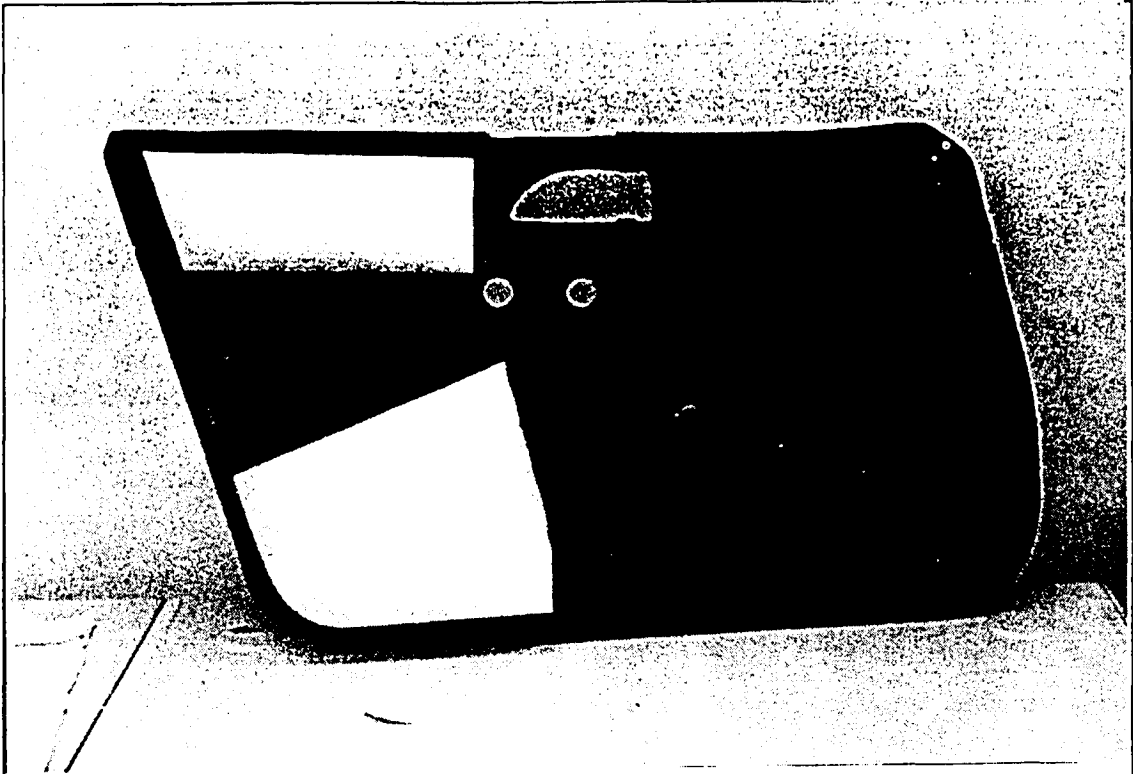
Modified Front Left Honda Accord Door Assembly (Viewed From Inside)
